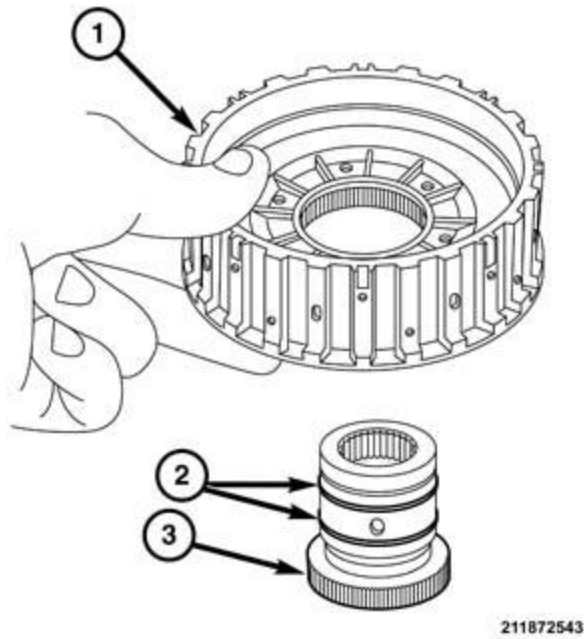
Clutch Hub, C-Clutch Shaft & O-Rings
